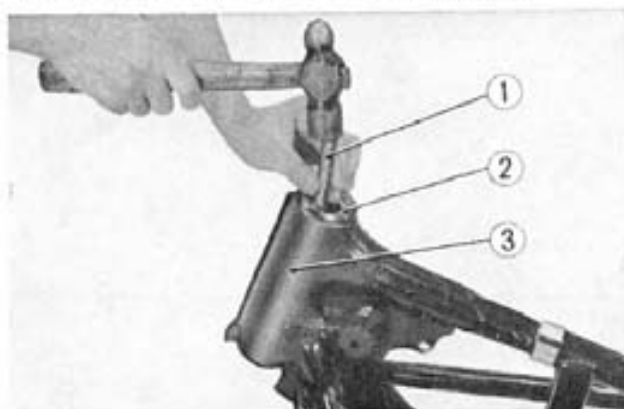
① Wooden drift ② Ball race ③ Head pipe
